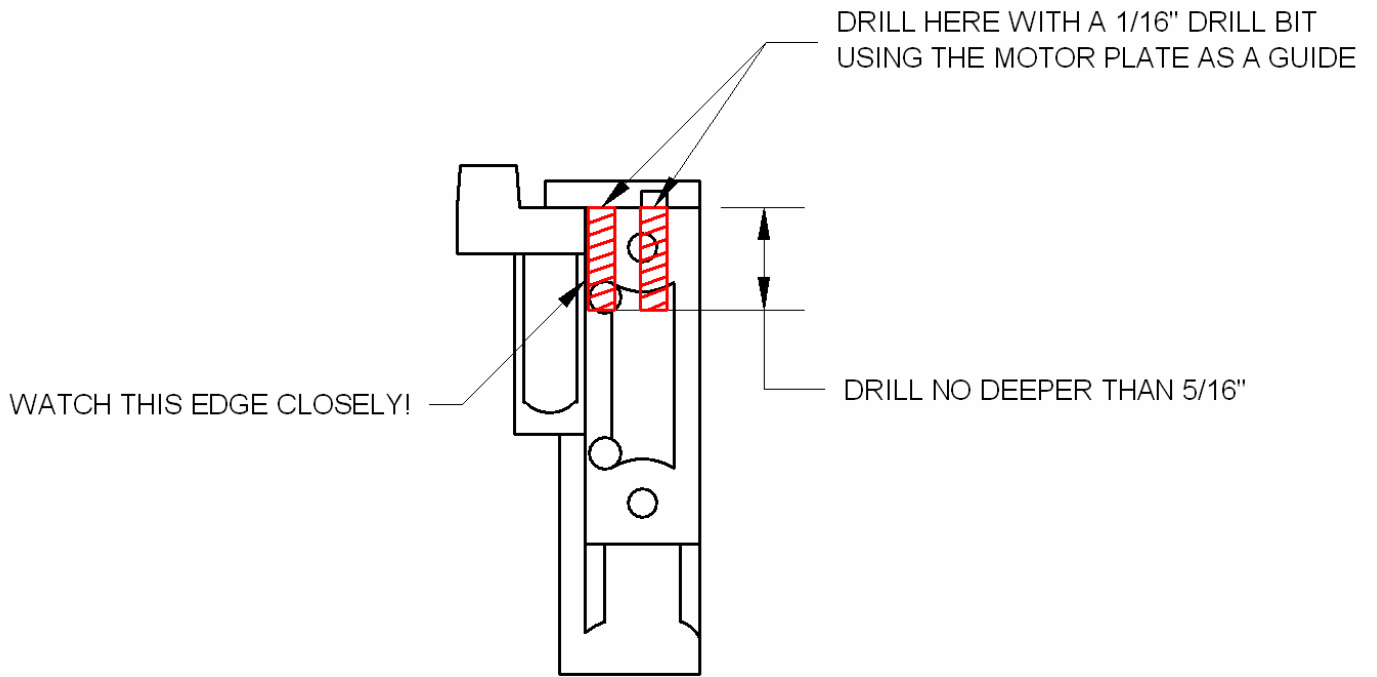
Underside view of rear bulkhead showing where to drill holes.
